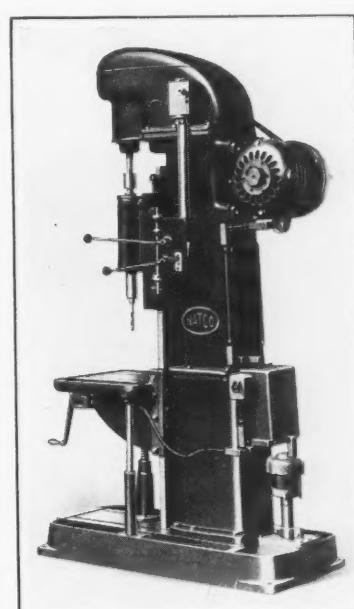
Operating Side of the Natco Single-spindle Drilling Machine Shown in Fig. 1
